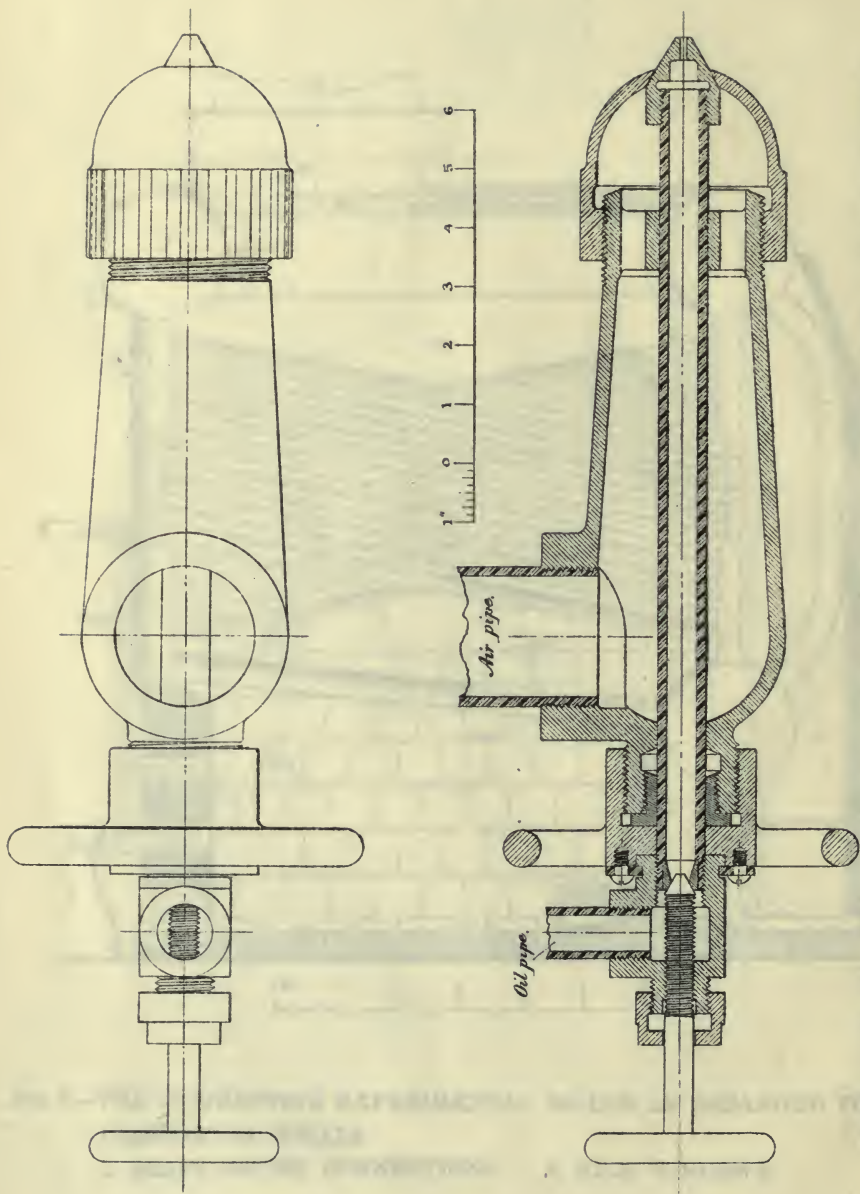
THE OIL CITY BOILER WORKS BURNER, USED IN TESTS NOS. 1 TO 8, INCLUSIVE.
